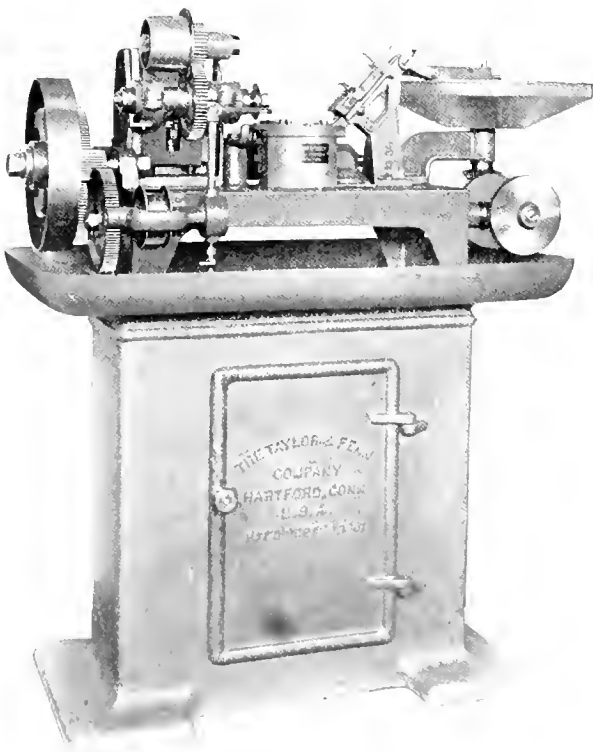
The Taylor & Fenn Automatic Screw Slotting Machine.
